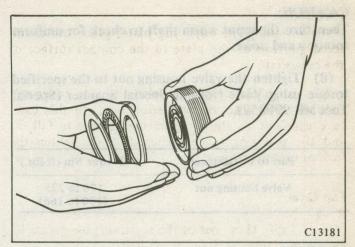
Reassembling the Thrust Plate and Needle Roller Bearing
